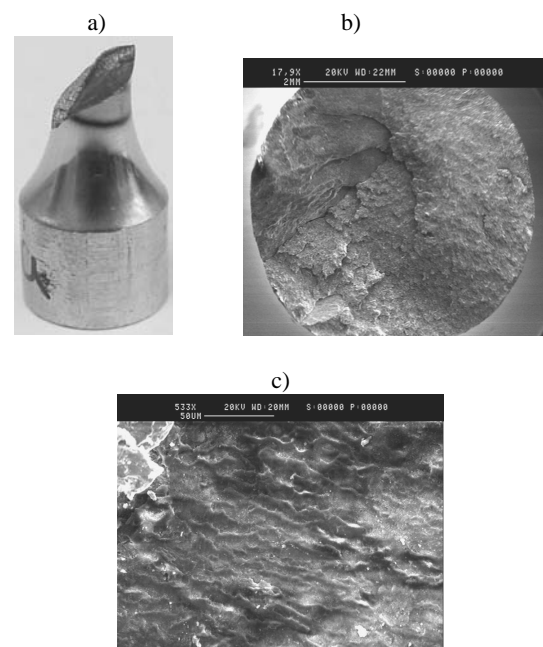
Torsional fatigue fracture surface $\tau_{max} = 250 \text{ MPa}$, $R=-1$, $N_f = 2.09 \times 10^9$, a) Overview of the fracture surface, b) shear band in the crack growth region
